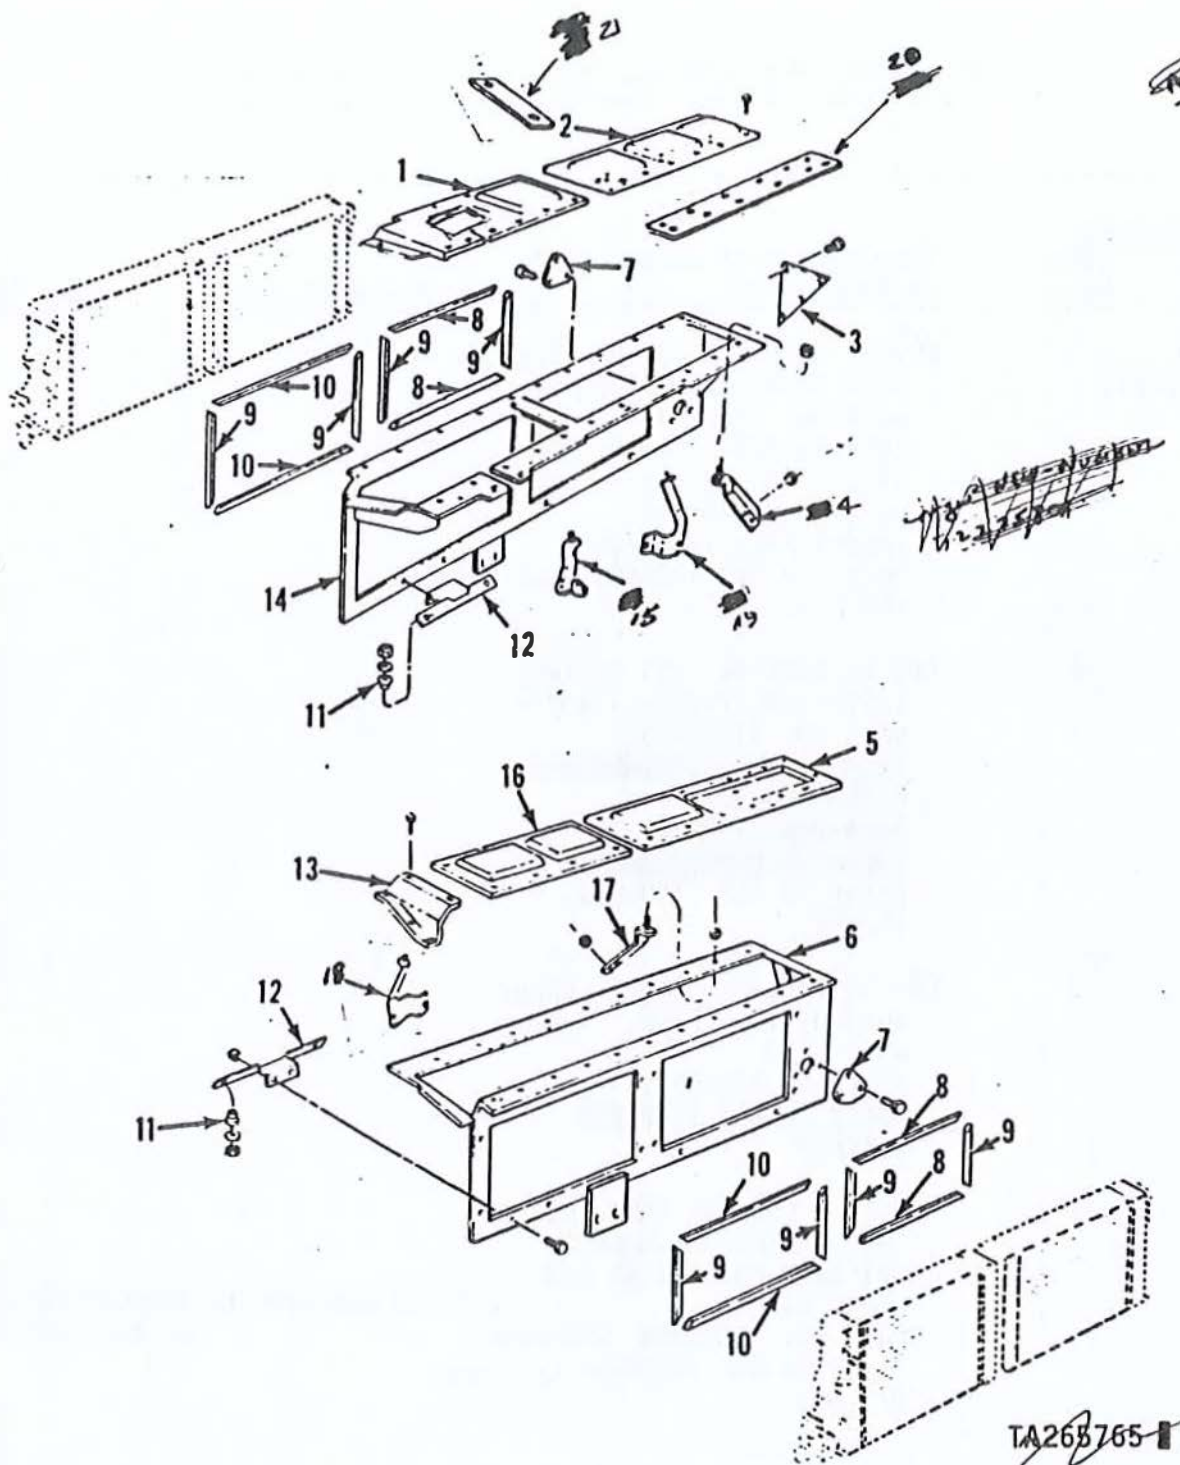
Oil cooler frames, shrouds, and associated parts.
